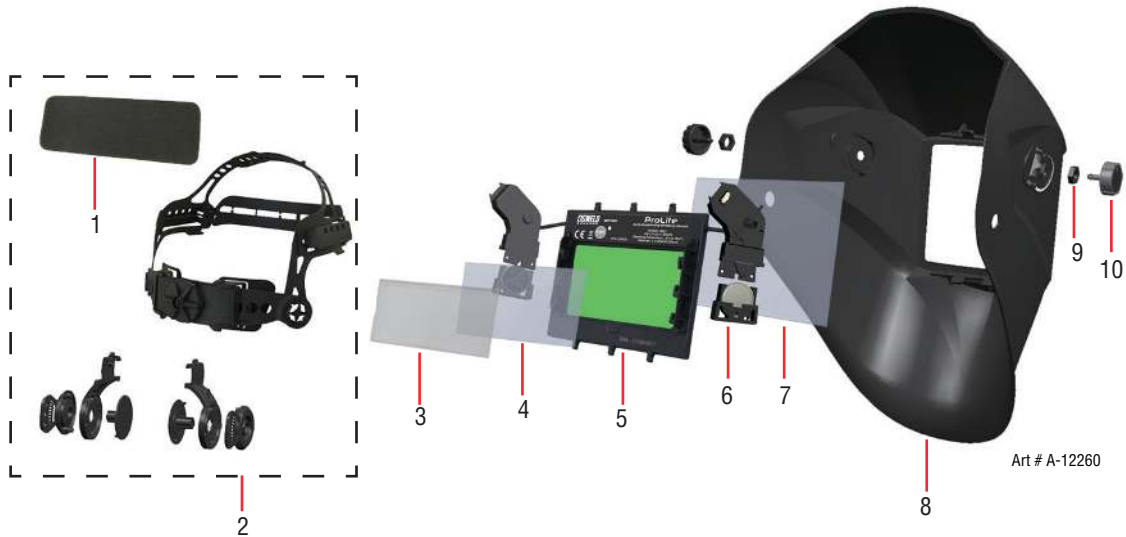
Exploded View of ProLite Auto-Darkening Welding Helmet
